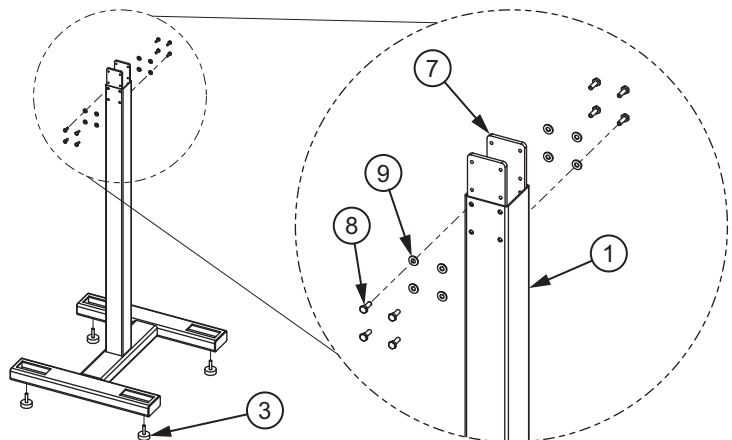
Initial Base Assembly (Dual Arm Stand Displayed)
